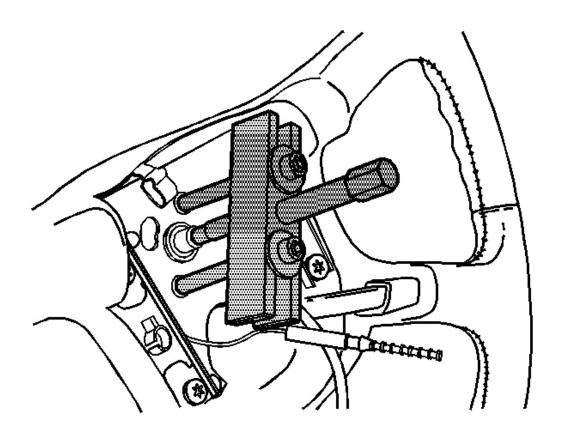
Removing Steering Wheel Using J 1859-A With J-36541-A Or J 42578 Courtesy of GENERAL MOTORS CORP.
